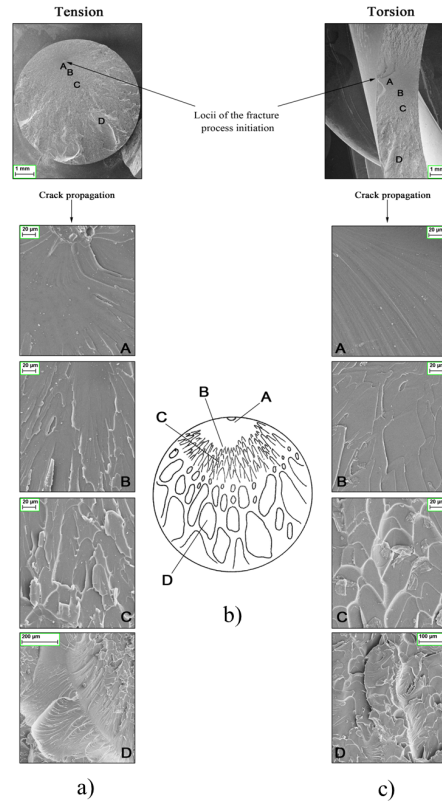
Detailed fracture surface analysis for tension (a) and torsion (c) test specimens. The schematic (b) is taken from [?] CHECK REF if not HULL.
